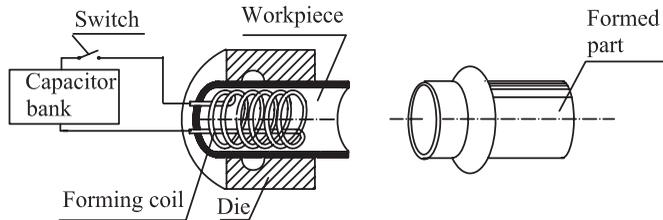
Schematic Illustration of Electromagnetic Radial Forming of Tube
